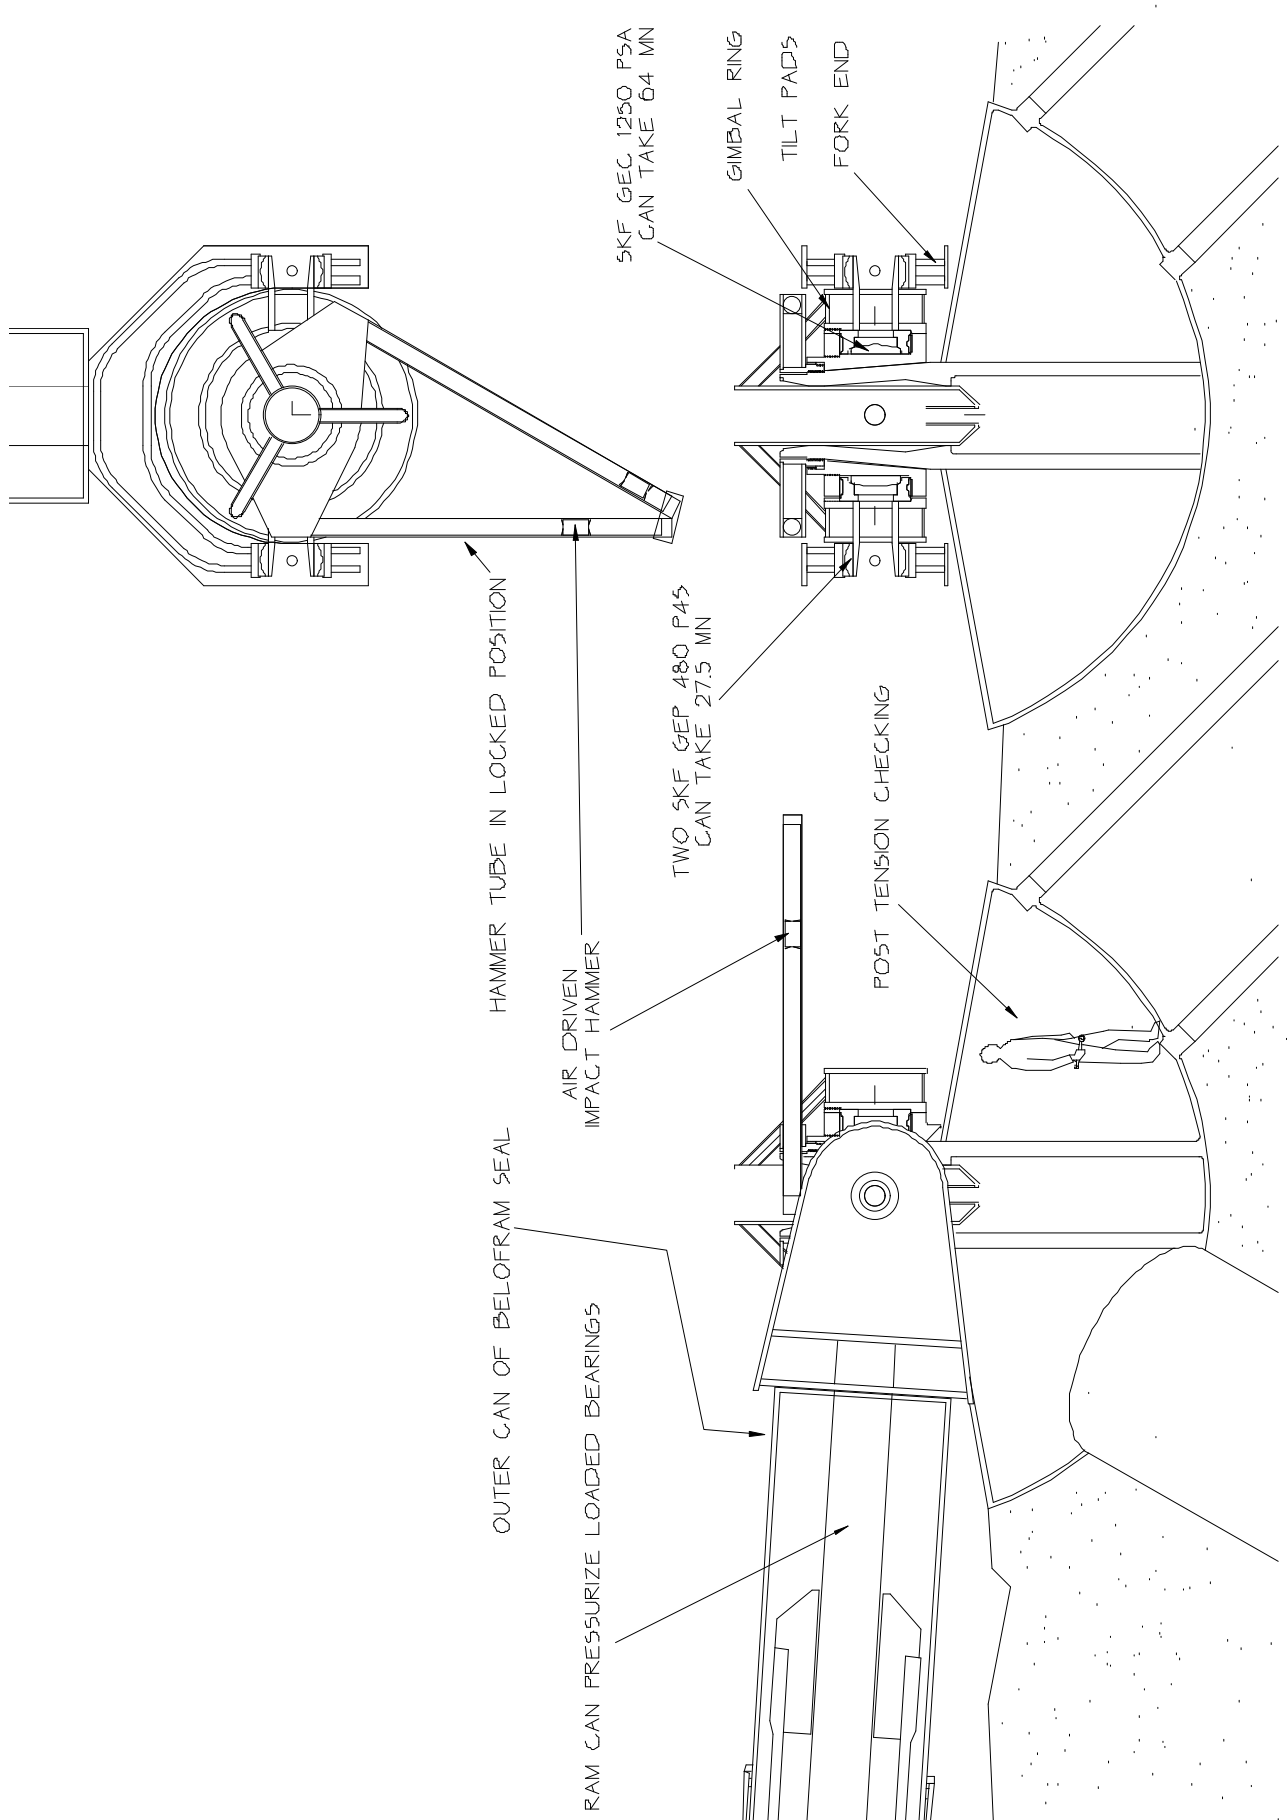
The universal joint at the bottom of the mooring legs can be disconnected from the tripod head by a hammer-driven breech screw.
